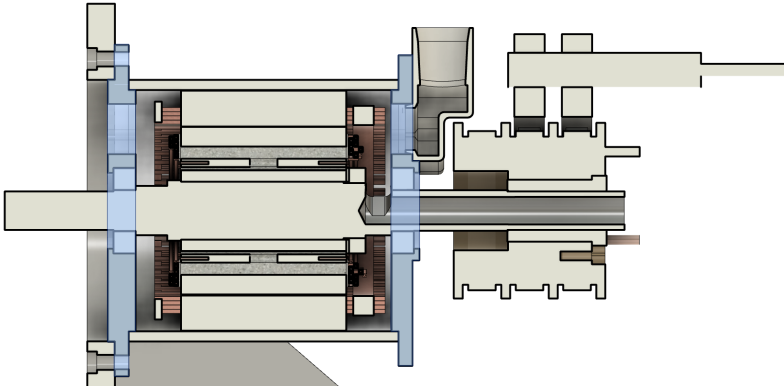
Radial cross section of the 3D CAD model of the prototype, highlighting the end plates in blue.
